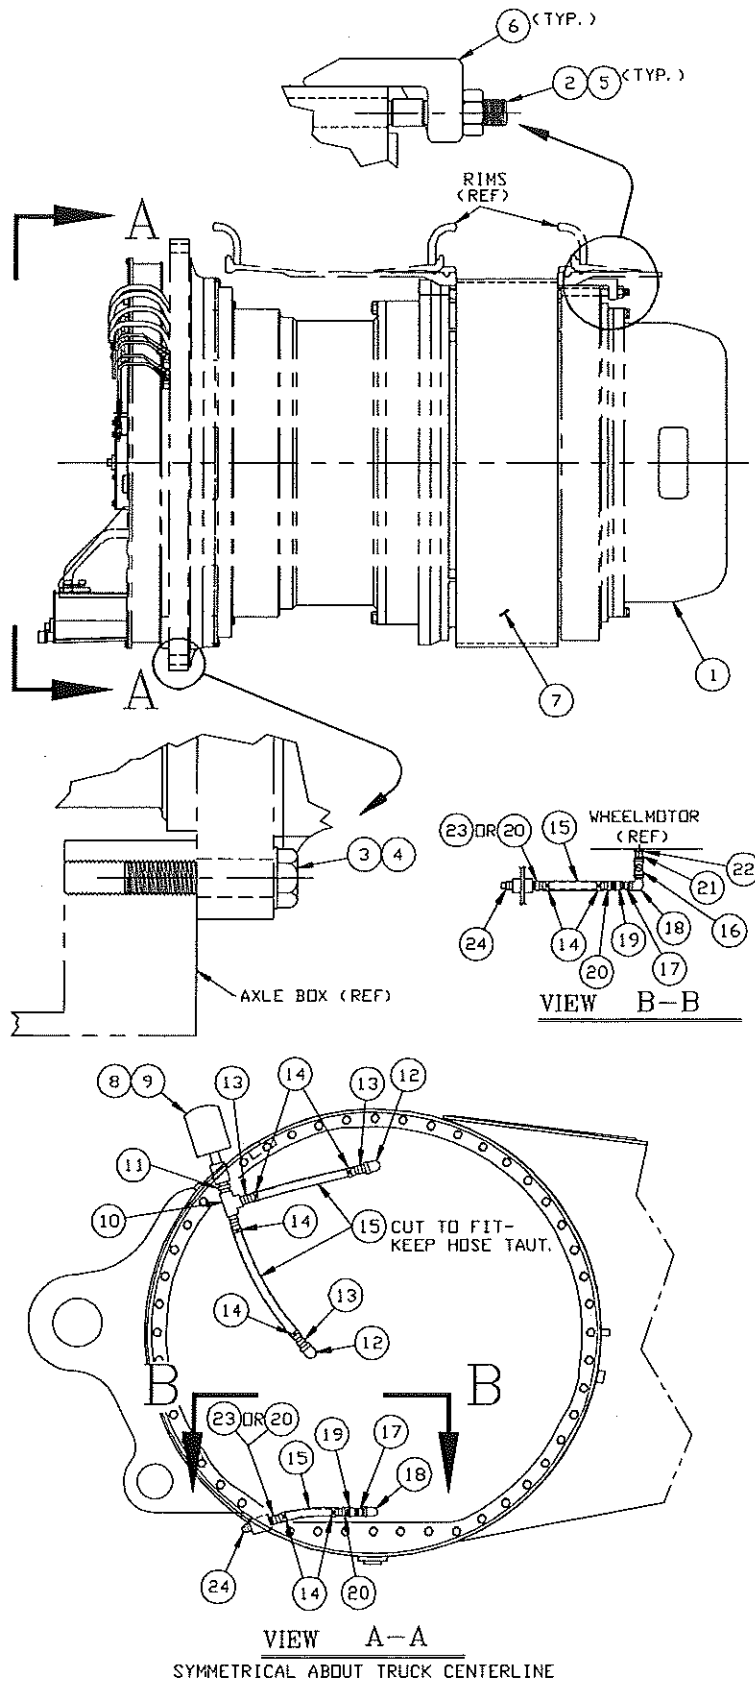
TYPICAL WHEELMOTOR INSTALLATION (A83829)
